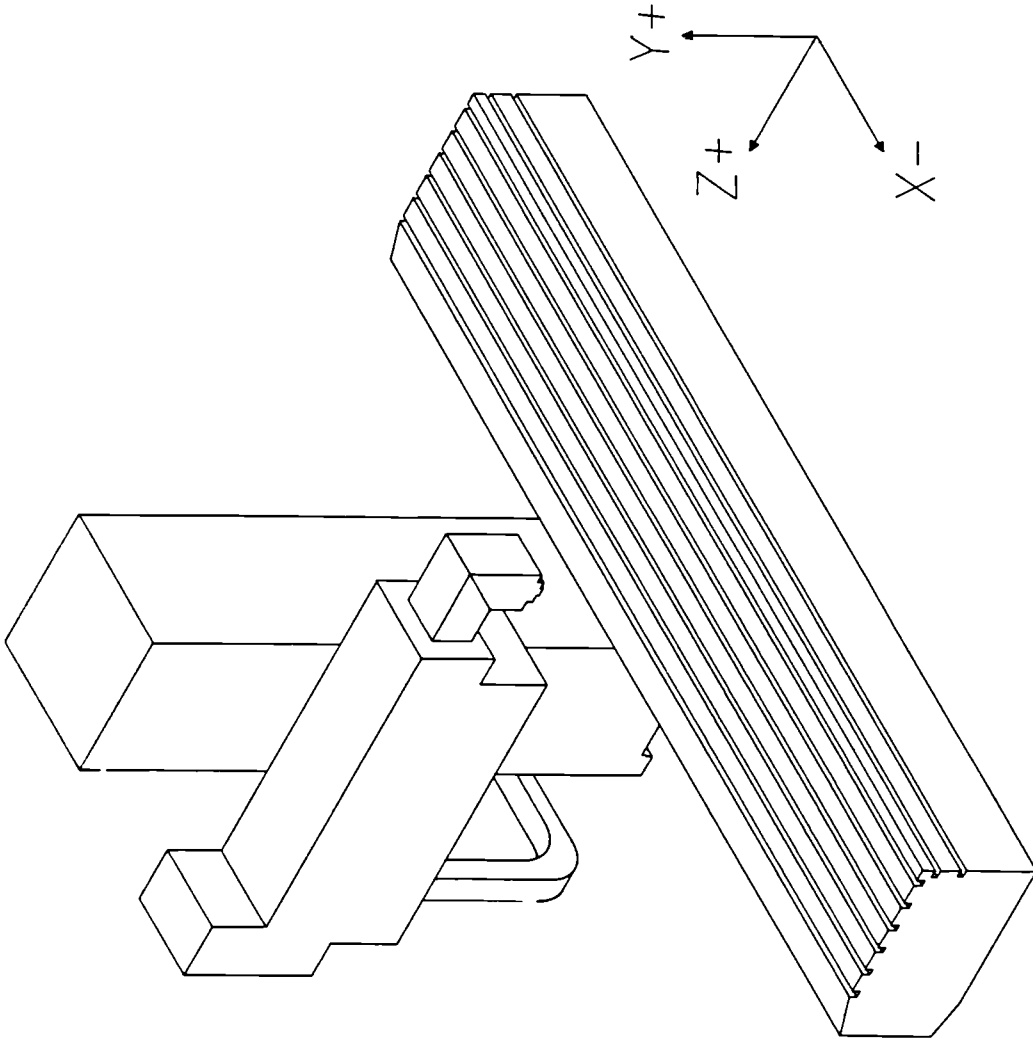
SCHEMATIC DIAGRAM OF A MOVING COLUMN MILLING MACHINE
